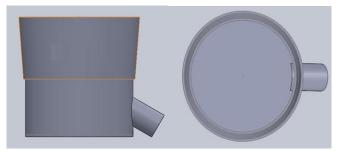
Air Inlet Pipe at 30° Inclined Horizontally-Cooling Tower Model
